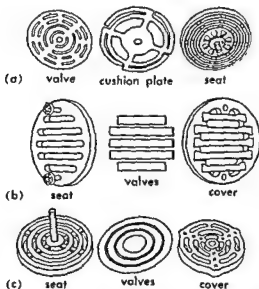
Air and gas compressor valves (a) Ingersoll-Rand ring plate. (b) Worthington feather valve. (c) Chicago pneumatic simplate valve (From T Baumeister, Marks' Mechanical Engineers' Handbook, McGraw-Hill, 6th ed., 1958)
